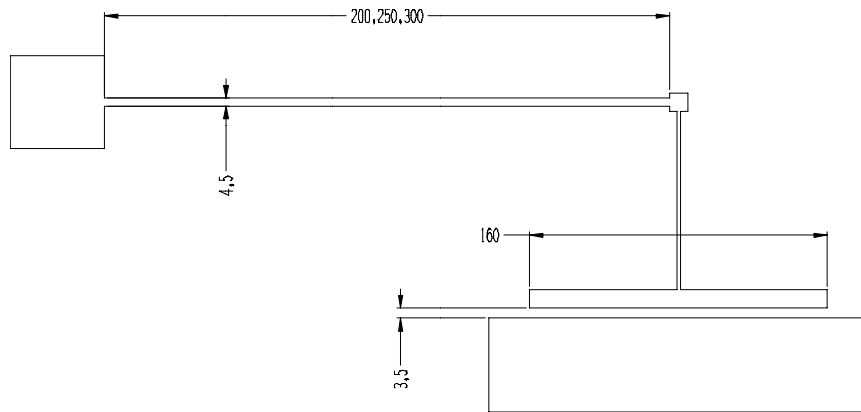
29: Design dimensions of improved cantilever pull-in test device
